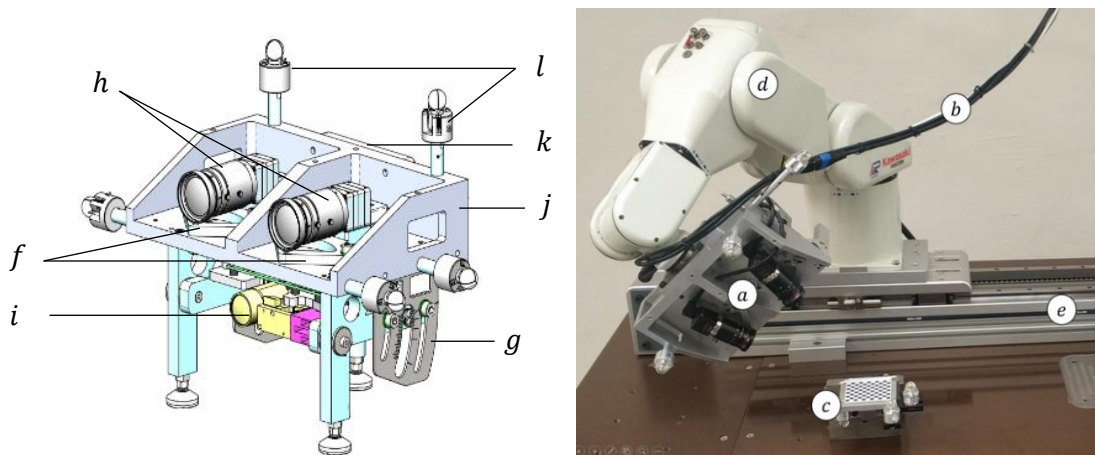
the LNE-developed close range photogrammetry system: (a) 3D scanning system; (b) Connection cables to the terminal computer; (c) Checkerboard calibration grid; (d) Industrial 6-axis KAWAZAKI robot; (e) 7th motion axis; (f) Camera mounting brackets; (g) Projector angular positioning; (h) Monochrome industrial cameras (i) Industrial projector; (j) Aluminium mounting system; (k) Scanner-robot fixing part; (l) Spheres for laser rangefinders.
